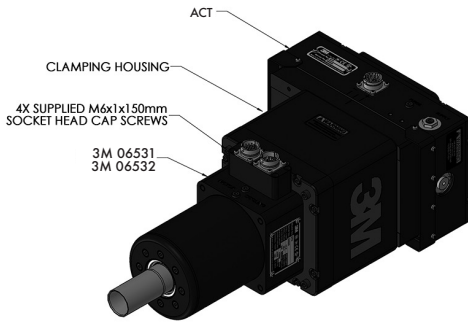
Spindle Motor Perpendicular-Axis Configuration
